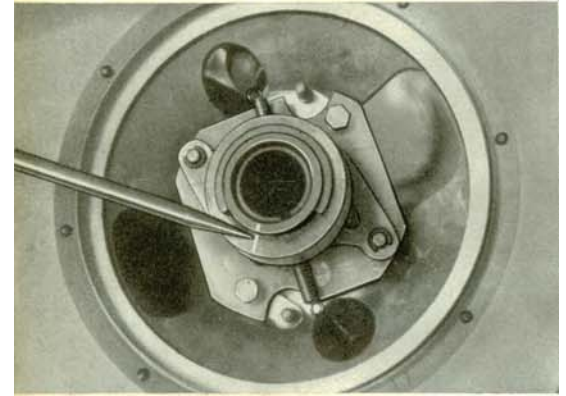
Caution: The breaker cam should be greased inside before being fitted. Fill groove machined in inner side of breaker cam with lubricating grease.
